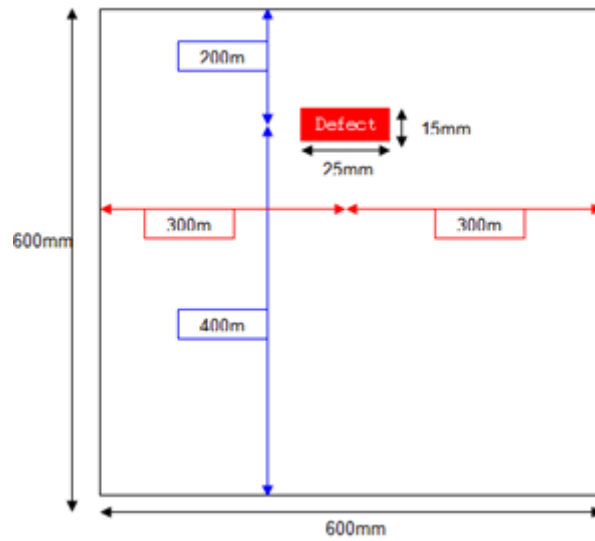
Stage 2 (600mmx600mm) CFRP & GFRP samples with 1 paper inclusion defect
